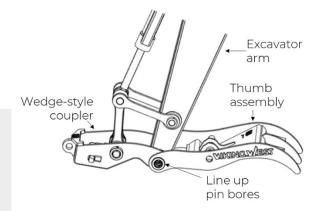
Lining up pin bores on coupler, excavator arm, and thumb assembly
